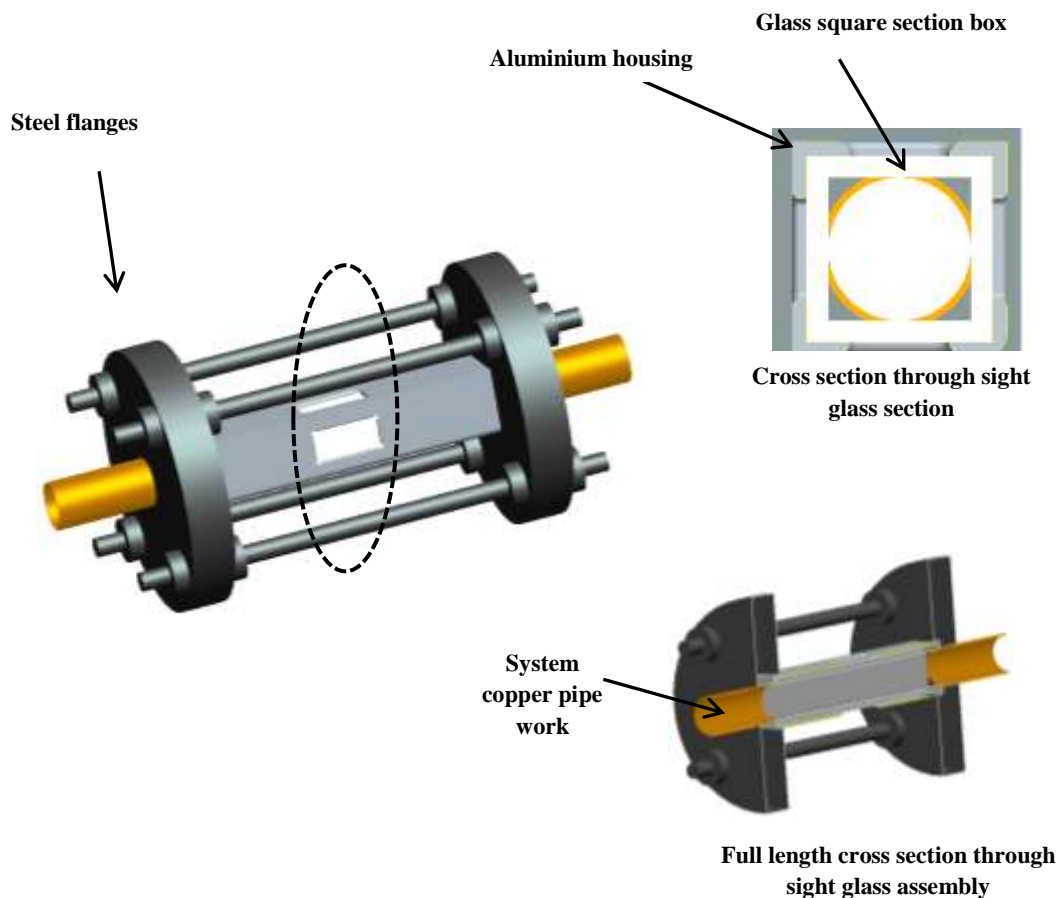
Pro Engineer Wildfire CAD model of the sight glass assembly and relevant cross sections.
